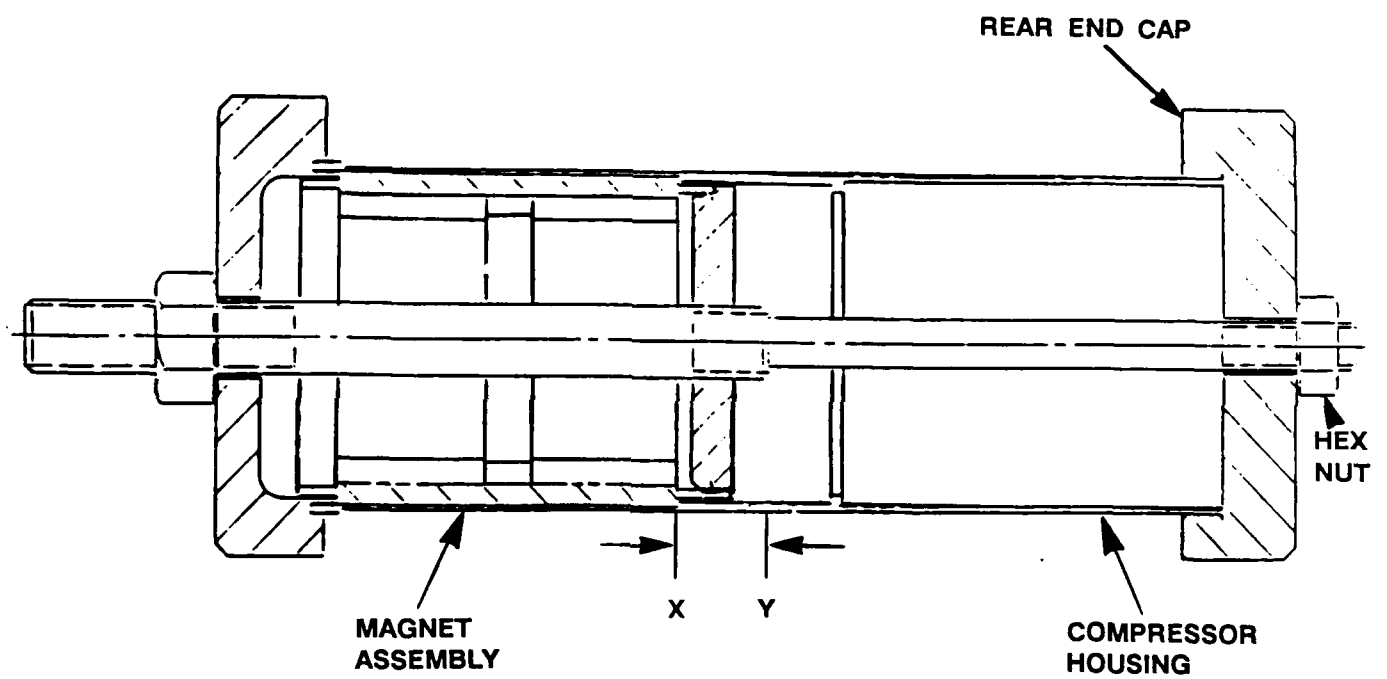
Housing and Magnet Bonding Fixture
